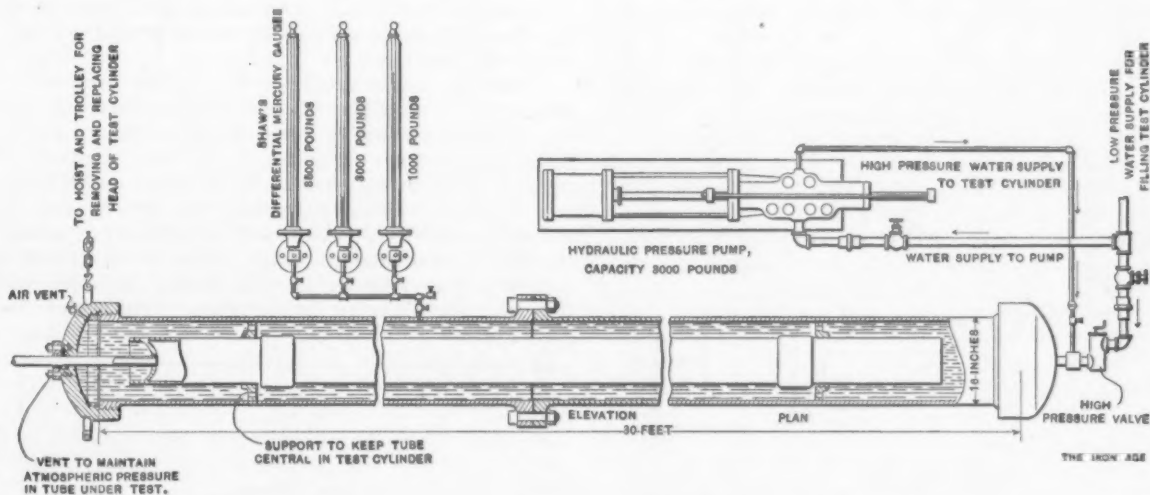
16-Inch Hydraulic Test Apparatus for Collapsing Tests on Tubes.
